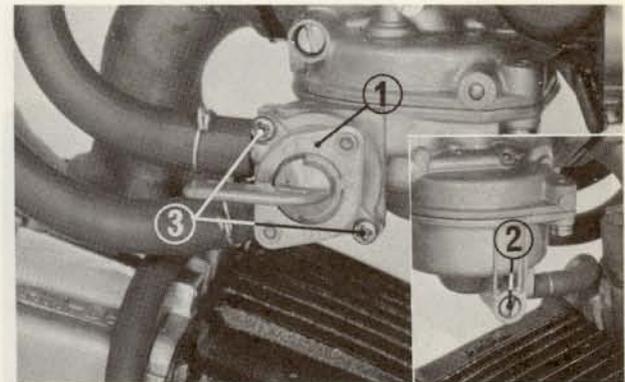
(1) Fuel valve (2) Drain screw (3) Screws
